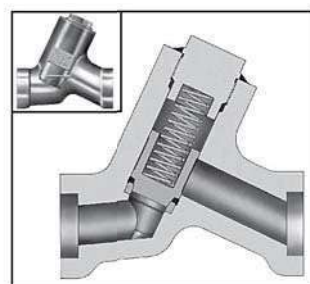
A Y-pattern inclined welded cover piston check valve.
